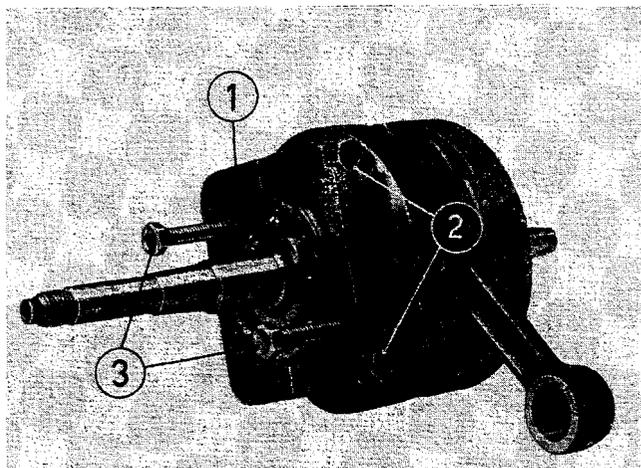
Pulling the 6306 ball bearings from the crankshaft
